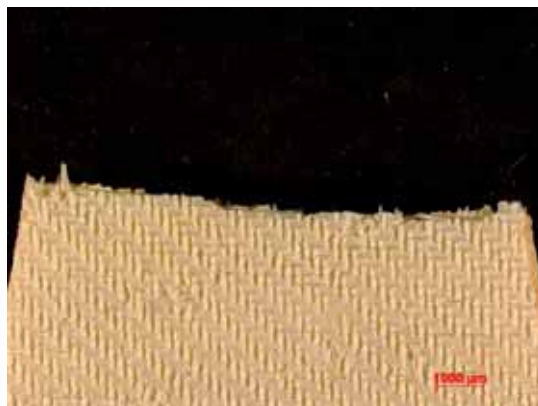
Fracture surface of the N610/ Al_2O_3 specimen with 8ply HSW subjected tension to failure in laboratory air at 1100 °C.
